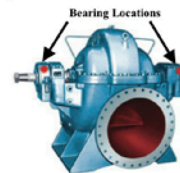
Bearing locations on a typical Goulds double suction pump. Courtesy of Goulds Pumps.
